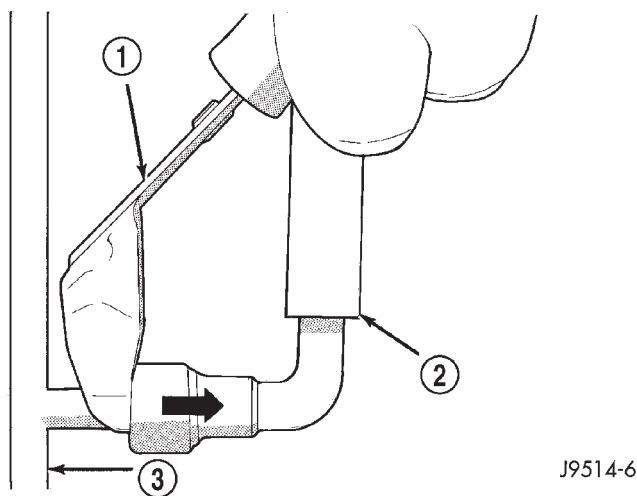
FUEL LINE DISCONNECTION USING SPECIAL TOOL
